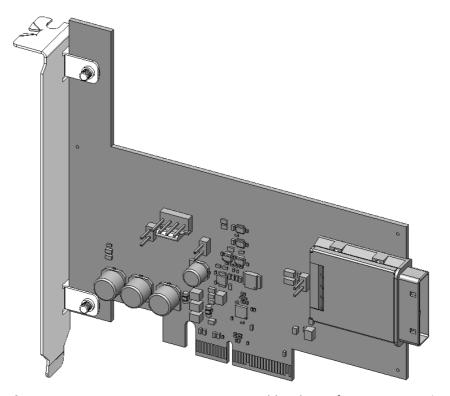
ES5305.1 PCI Express GEN2 x4 cable adapter for ES5300 Housing
